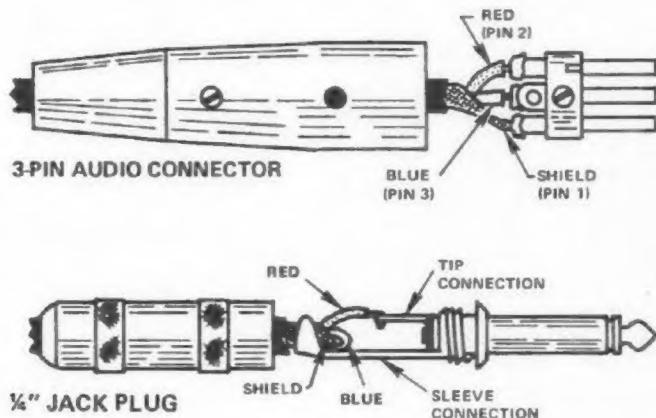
3-Pin Connector & 1/4" Jack Plug Wiring Connections
